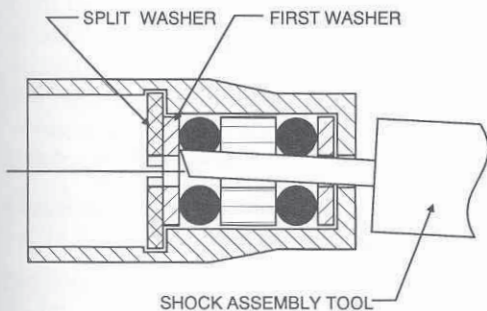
& 95 HOW TO DISMANTLE THE SHOCK SEAL PARTS Fig. 96 shows a cutaway of the bottom portion of the shock body showing how all of the parts fit into the shock seal cavity. Fig. 97 is the same cutaway drawing depicting the shock assembly tool being used to remove the shock seal parts.
